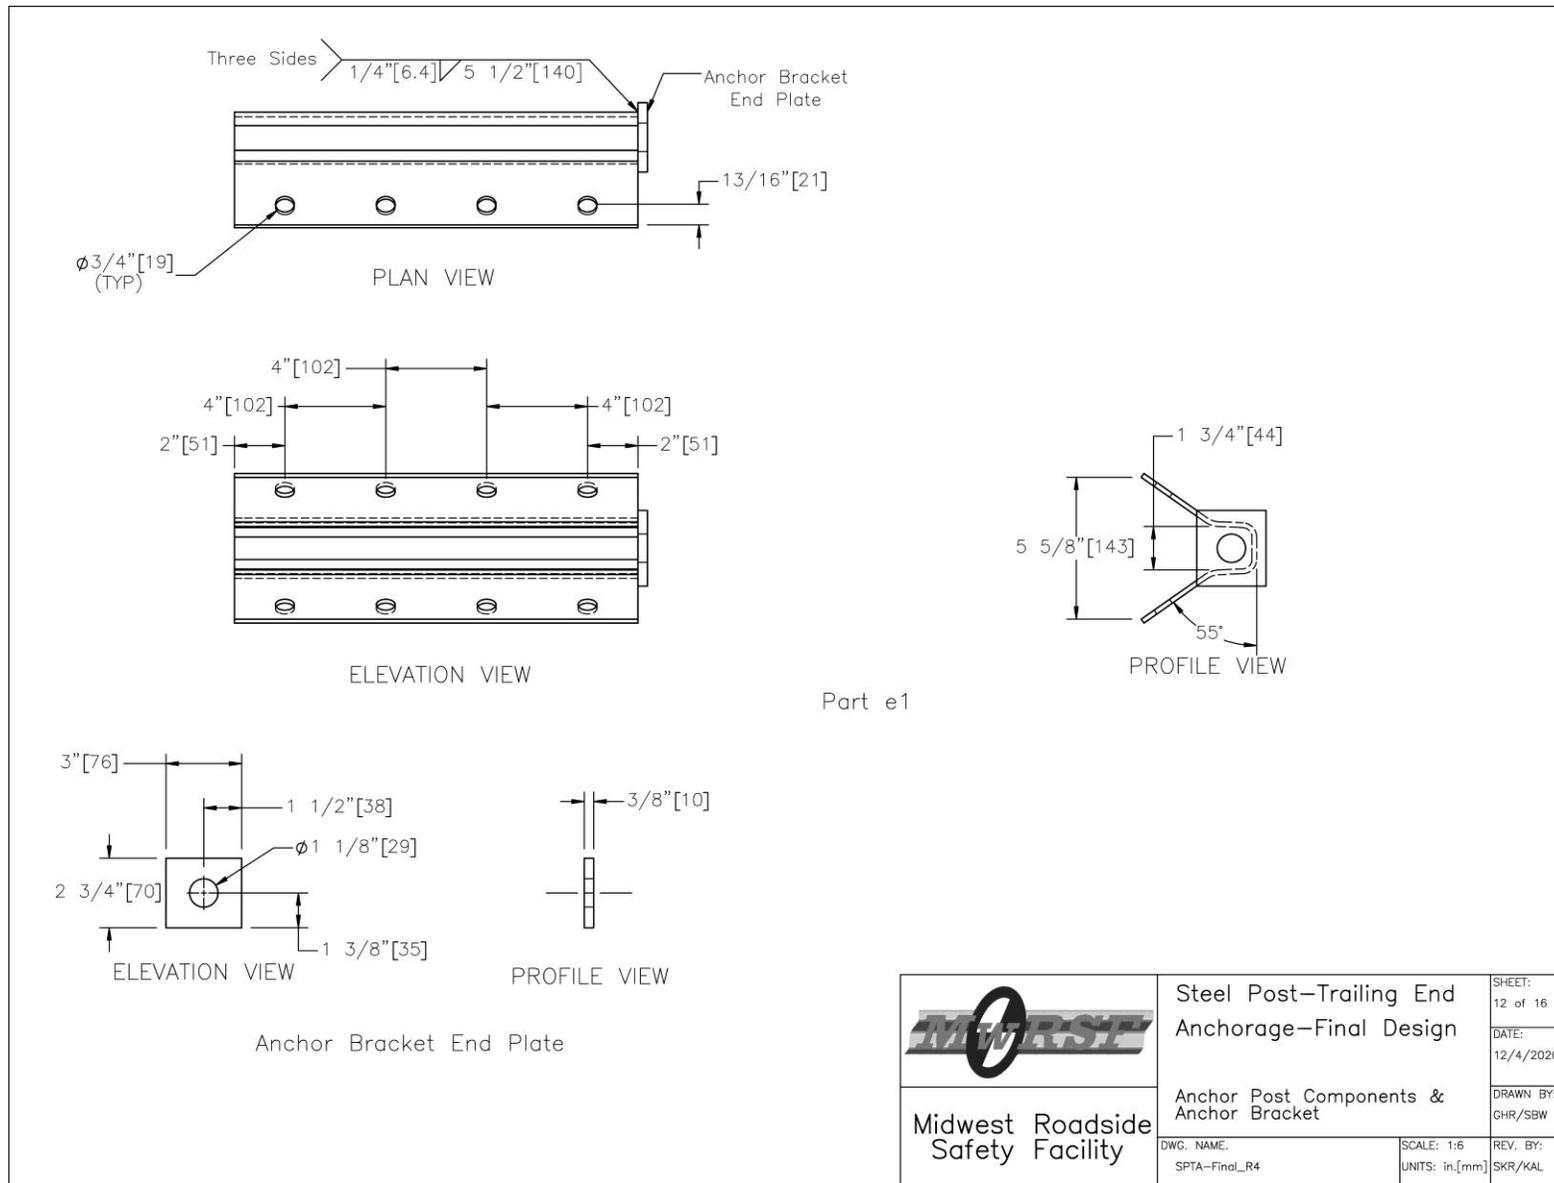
Steel-Post Trailing End Anchorage, Anchor Post Components and Anchor Bracket
